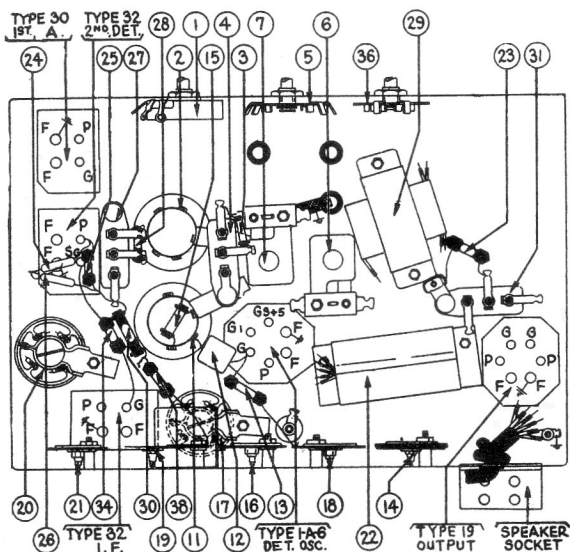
Bottom of Chassis Showing Parts; and Sockets for Testing Voltages
